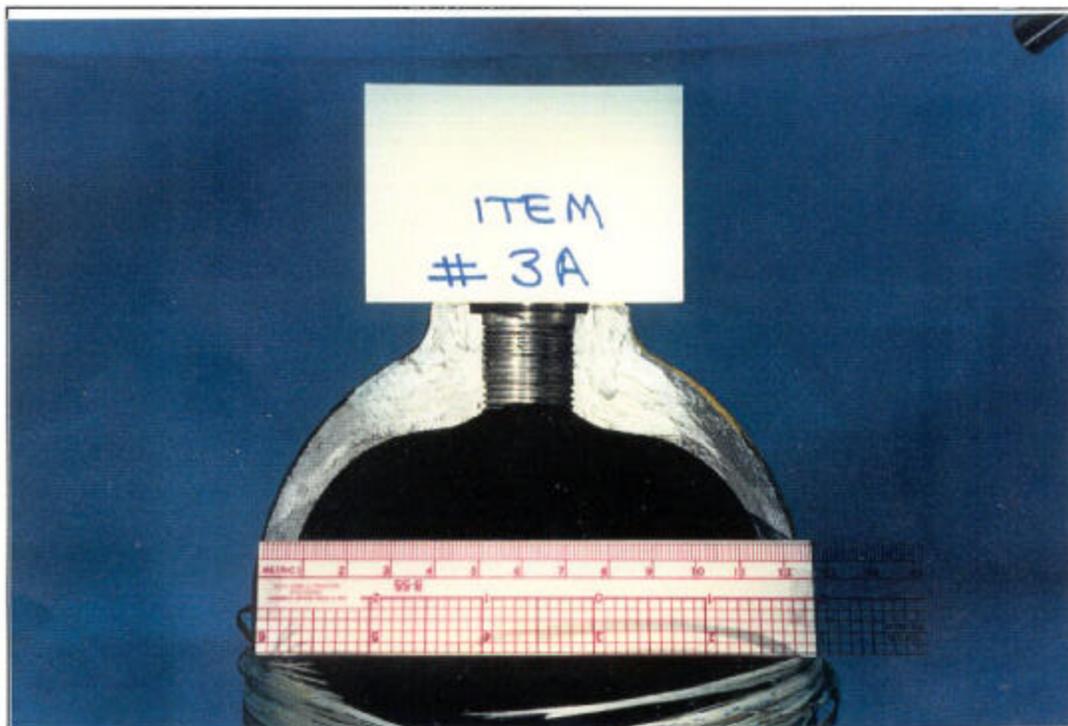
HEAD OF THE RUPTURED CYLINDER SHOWING LOCATION OF CRACKS IN THE SHOULDER OF THE CYLINDER HEAD -- ITEM 3A
